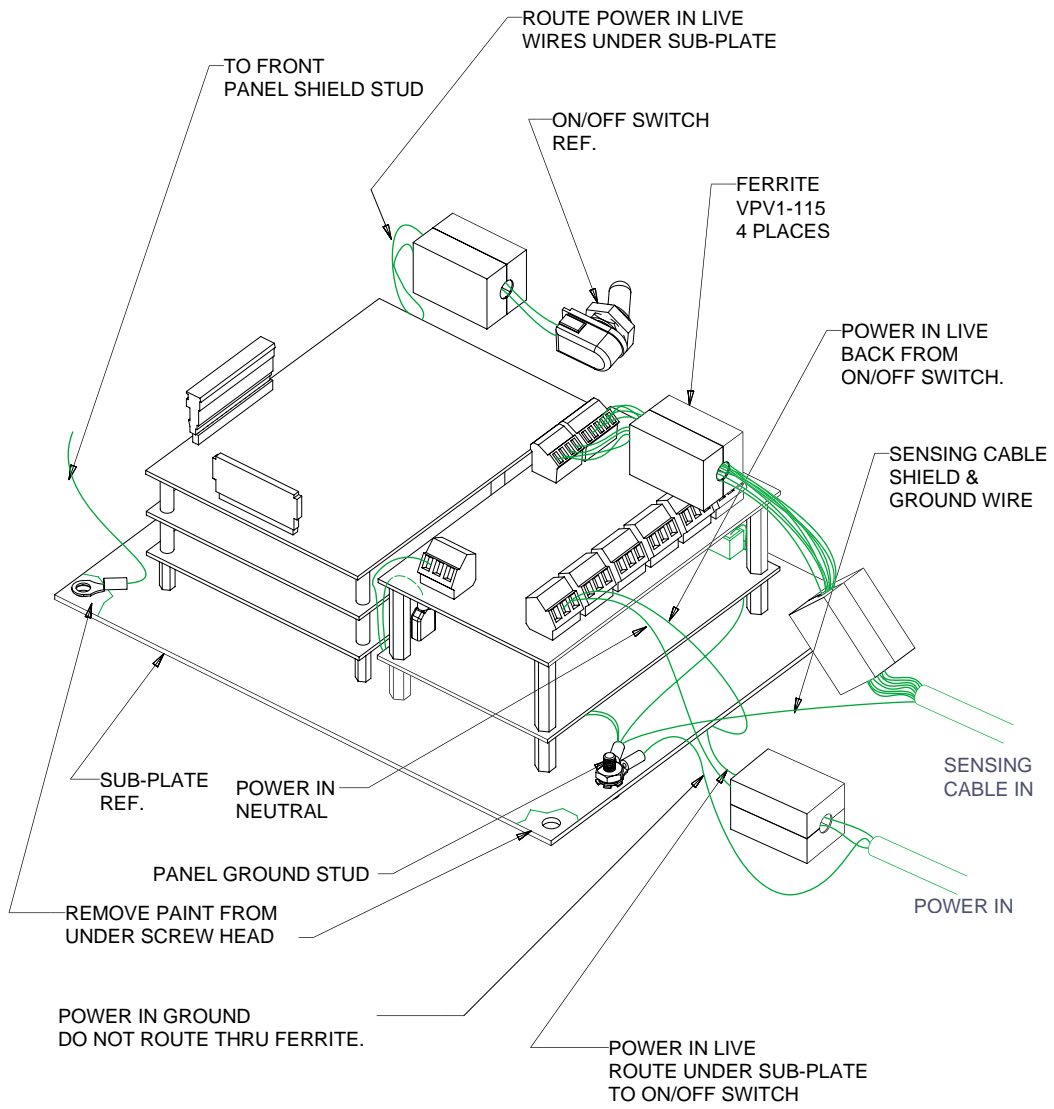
Ferrite installation and grounding detail. Components shown are located inside of the AST control box.
